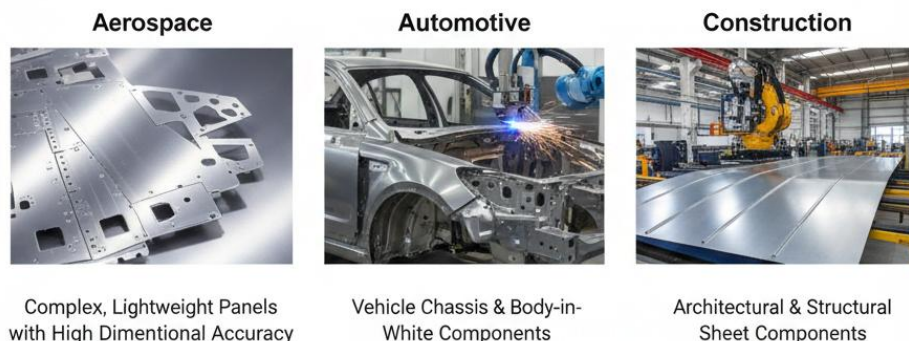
Key industrial application areas for precision sheet metal cutting.
